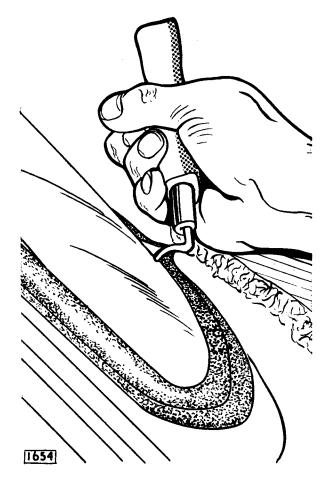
Using the special tool ("A" Fig. 16) for lifting the rubber over the glass
